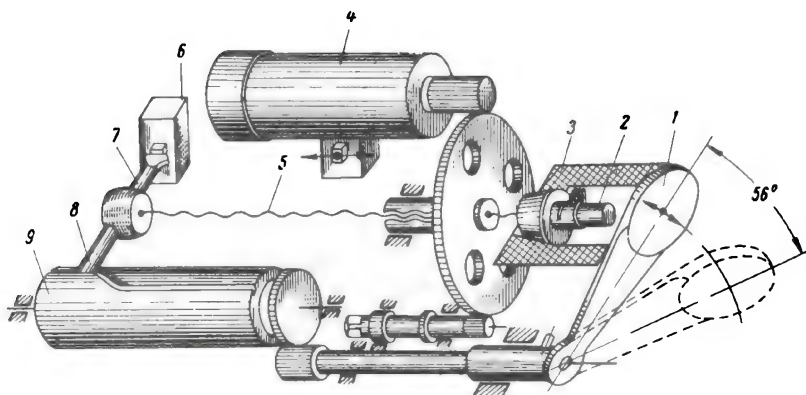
Gear diagram of manipulator of type ПYP-1 inspection unit
